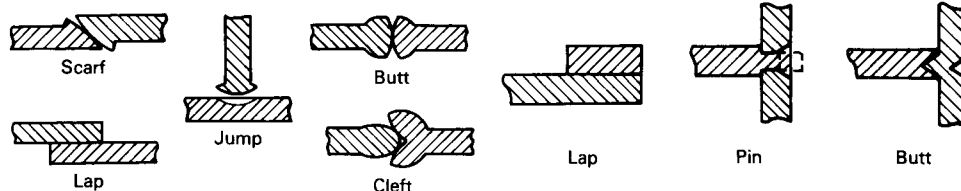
Typical joint configurations used for manual forge welding applications. Source: Ref 1
